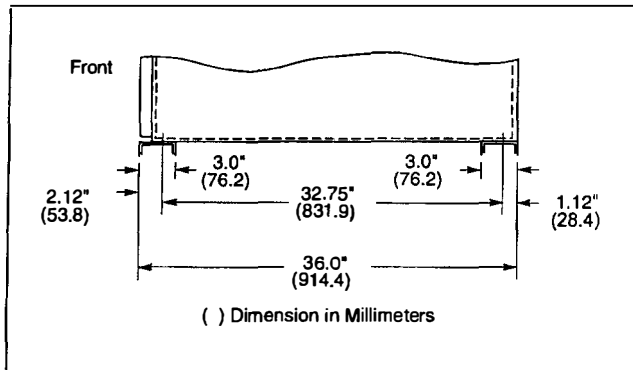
Top View and Typical Floor Plan with Bus Located in Top Compartment
